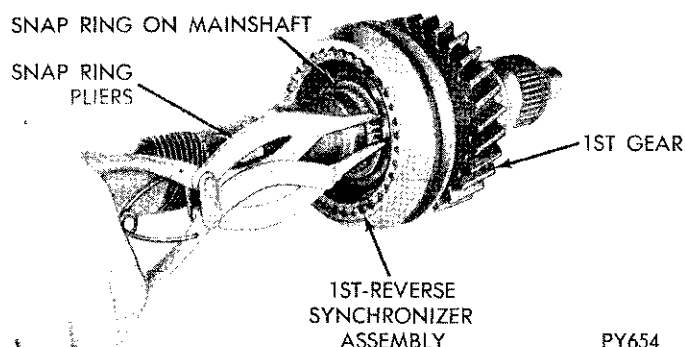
Snap Ring—1st-Reverse Synchronizer Clutch Gear—Removal or Installation
